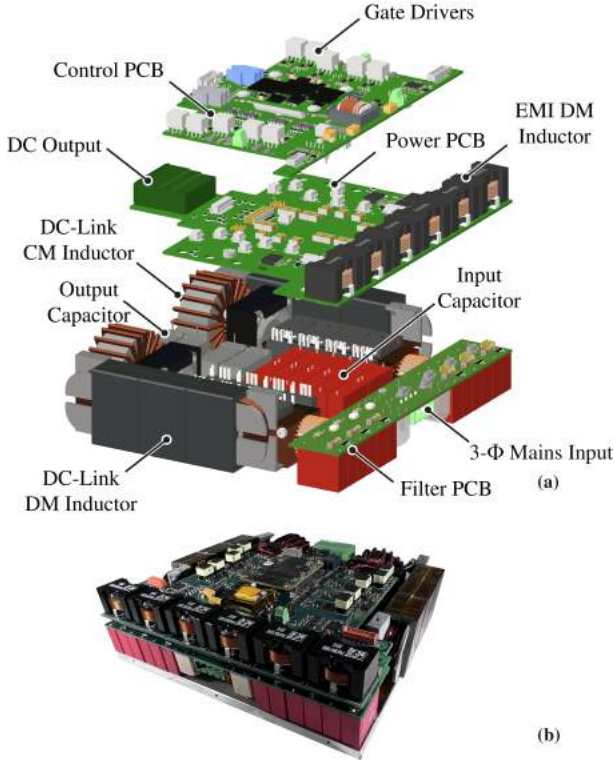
(a) Exploded view of the 10 kW 3- Φ bB current DC-link PFC rectifier hardware demonstrator (see Fig. 2.2 for the schematics and Tab. 2.1 for key components) and (b) photo of the realized prototype. The dimensions are $184 \times 172 \times 49 \text{ mm}^3$ ($9.8 \times 5.1 \times 1.9 \text{ in}^3$), resulting in a power density of 6.4 kW/dm^3 (107.5 W/in^3). Operating from the 400 V 3- Φ mains and employing 1200 V SiC (CSR-stage) and 900 V SiC (DC/DC-stage) power MOSFETs, a wide output voltage range of 200 V to 1000 V is covered.
